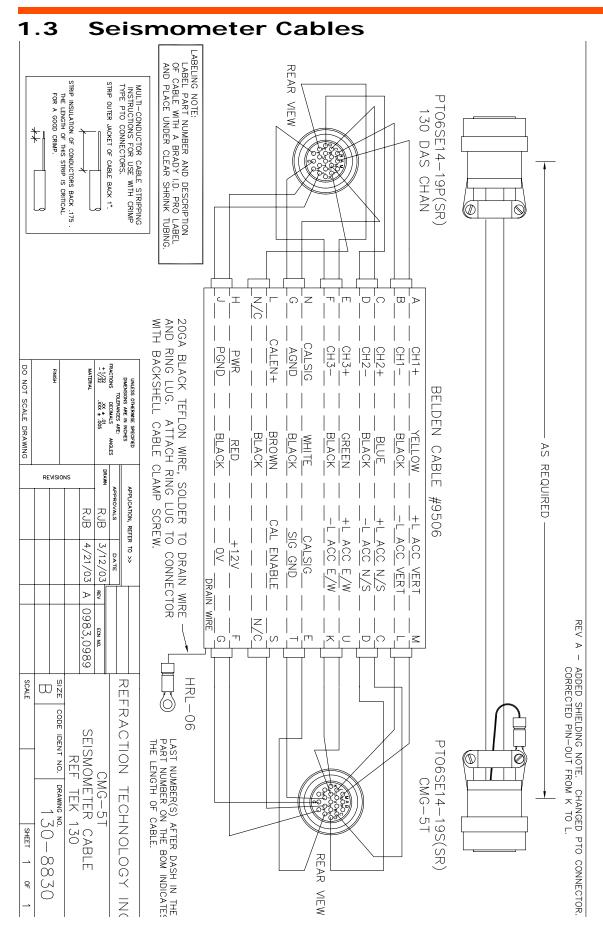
26 130-8830 - CMG-5T Seismometer Cable
